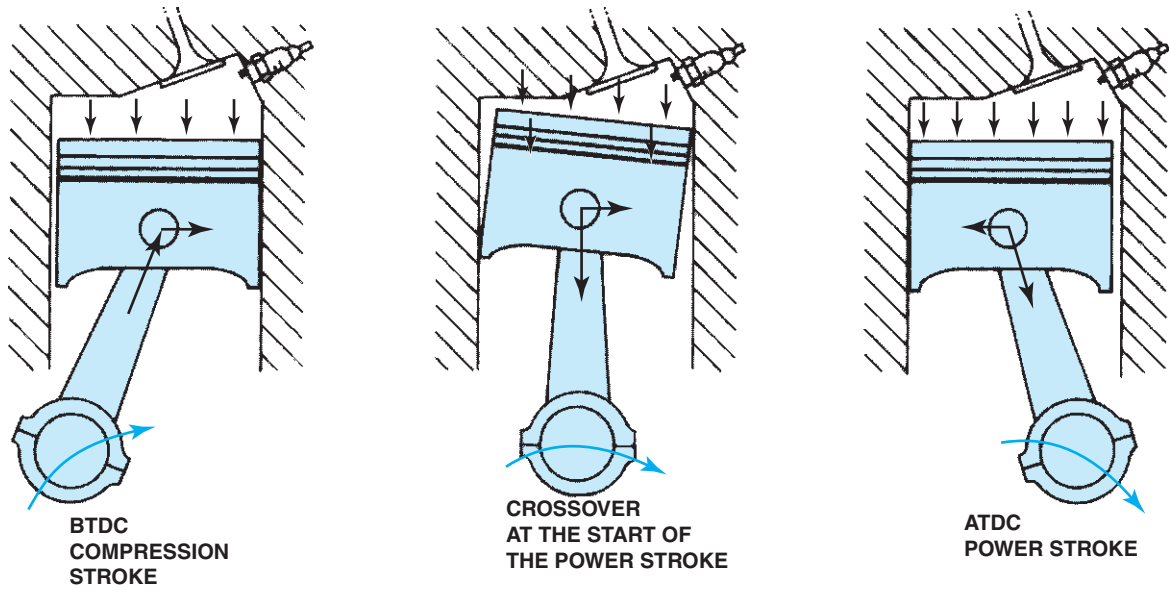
Engine rotation and rod angle during the power stroke causes the piston to press harder against one side of the cylinder, which is called the major thrust surface.
